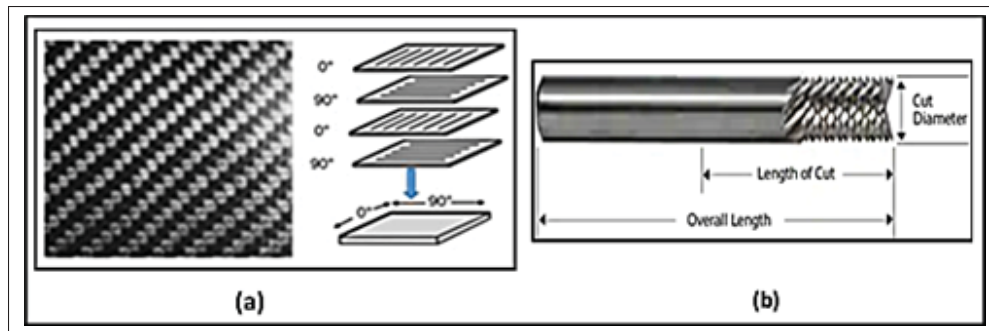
(a) Composite lay-up, (b) chip breaker routed geometry
